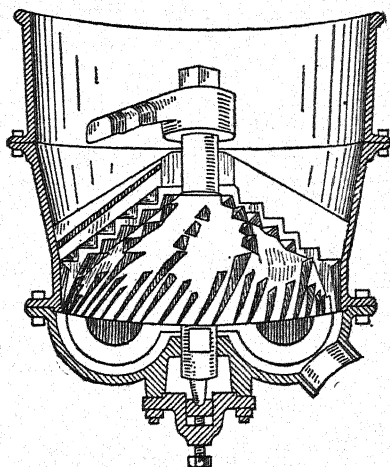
Modern tanning. Bark mill. (*Courtesy of G. W. Baker Machine Company.*)
